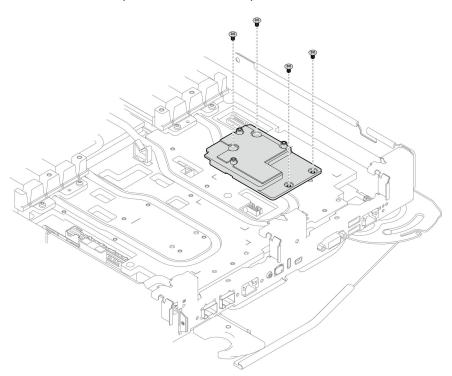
ConnectX-7 NDR 400 riser assembly interface plate installation
